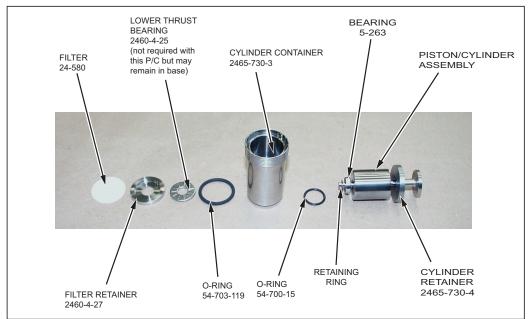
Parts Required for Operation of the 35 Bar P/C
